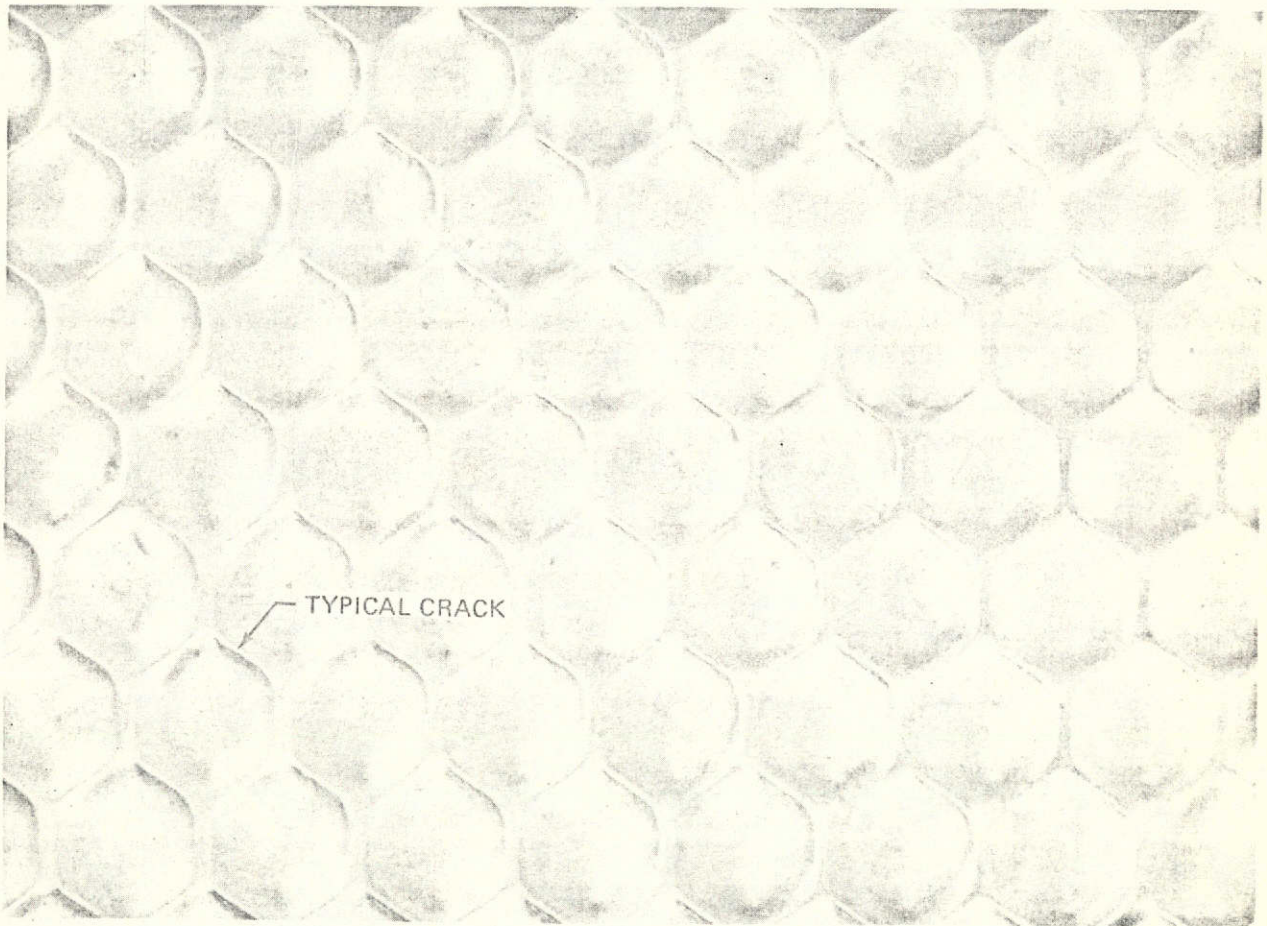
FATIGUE CRACK LOCATION IN HEX PATTERN ON TOP OF SPECIMEN 9
